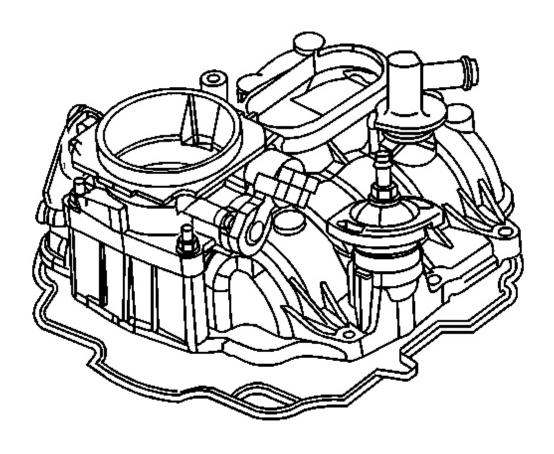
Intake Manifold Upper Gasket Courtesy of GENERAL MOTORS CORP.
